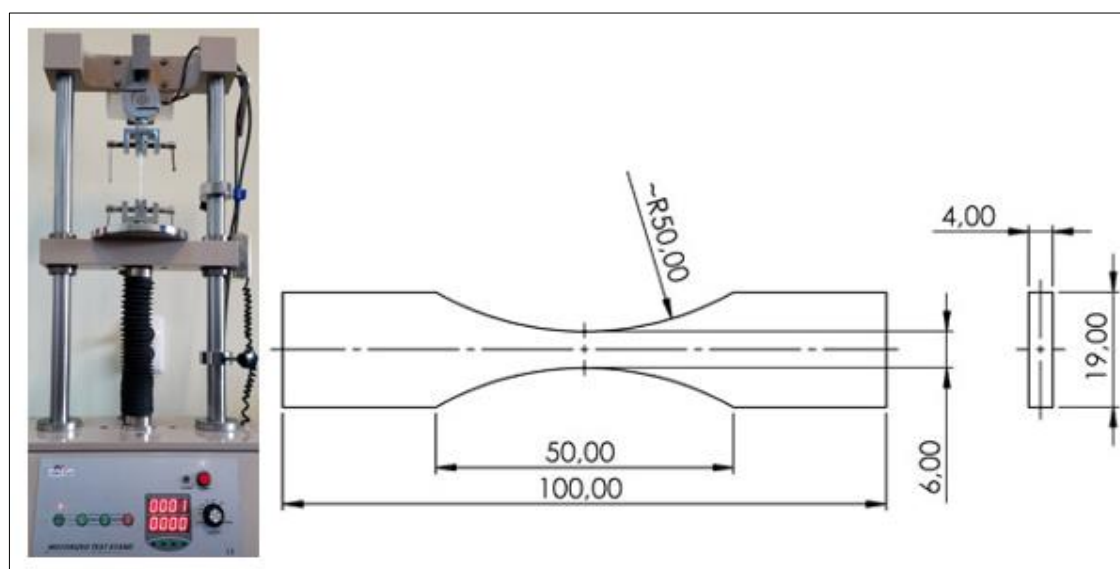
SAMA-SAHDV-10K double column test stand and specimen dimensions
